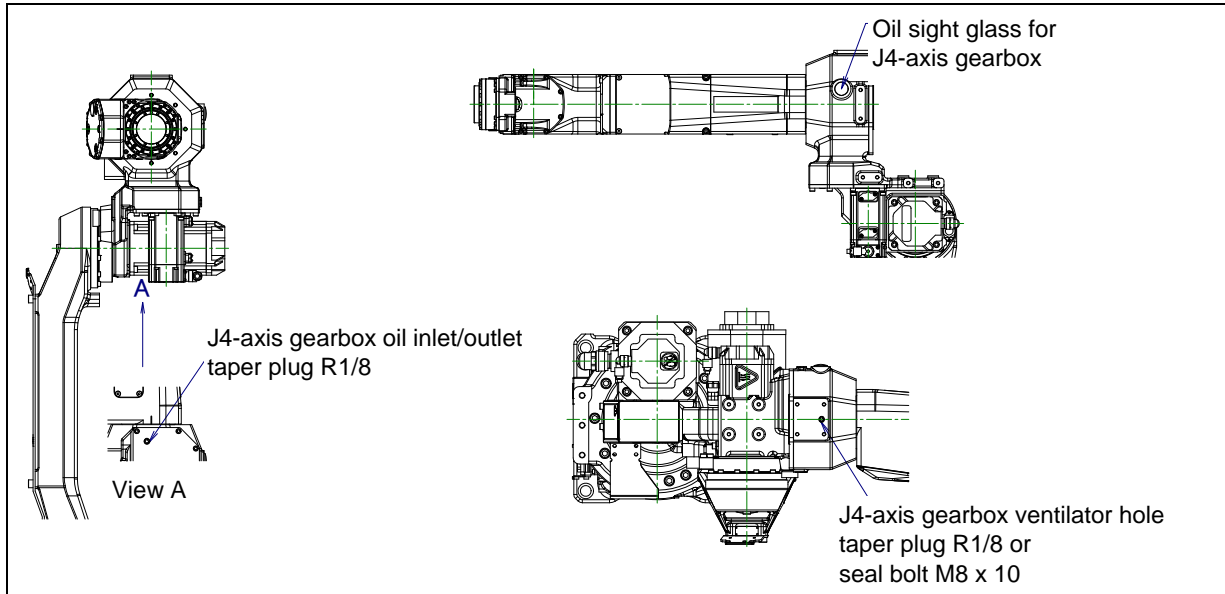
(b) Greasing point of J4-axis gearbox
